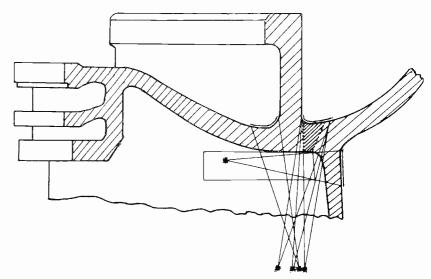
H.P. turbine casting, and sketch showing section of welded region after removal of cracks
